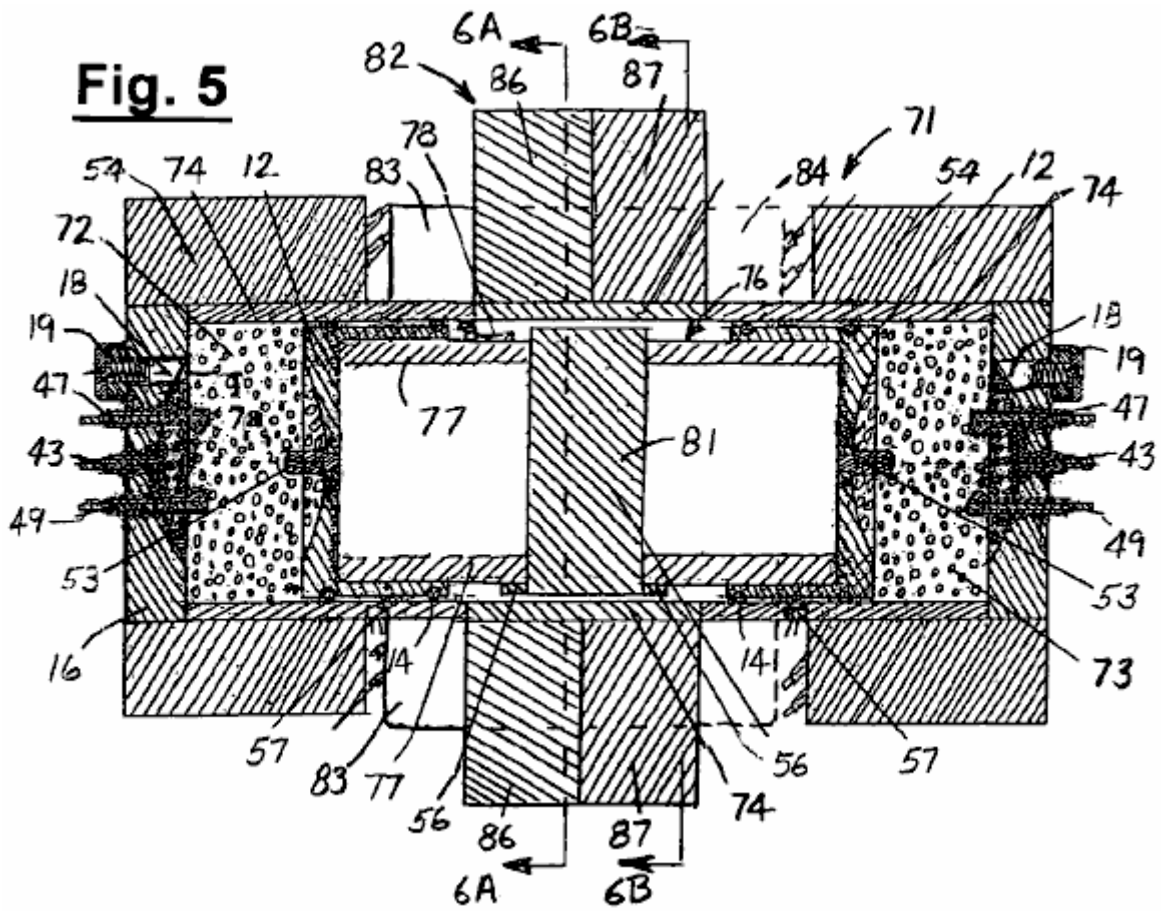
is a centreline sectional view of another embodiment of an internal explosion engine and generator incorporating the invention.
